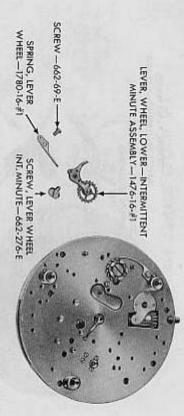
Elgin Stop Watch — Seconds and Minute Wheel Assembly Removed
